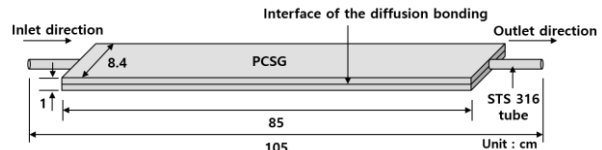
Schematic image and dimensions of the manufactured PCSG.
